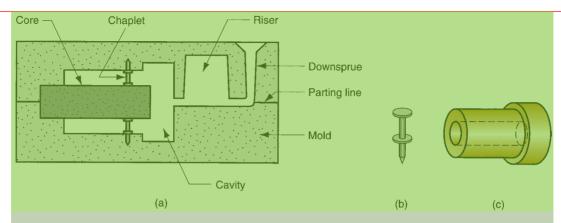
(a) Core held in place in the mold cavity by chaplets, (b) possible chaplet design, and (c) casting with internal cavity.
